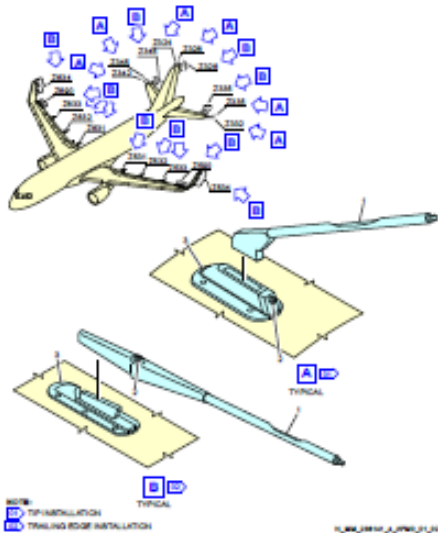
E (SHEET 1) - Static Discharger - Location and Detail
